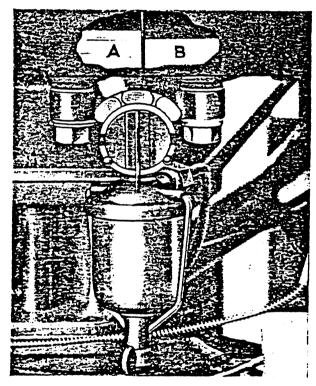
FUEL TANK VALVE & SEDIMENT BOWL ASSEMBLY.
